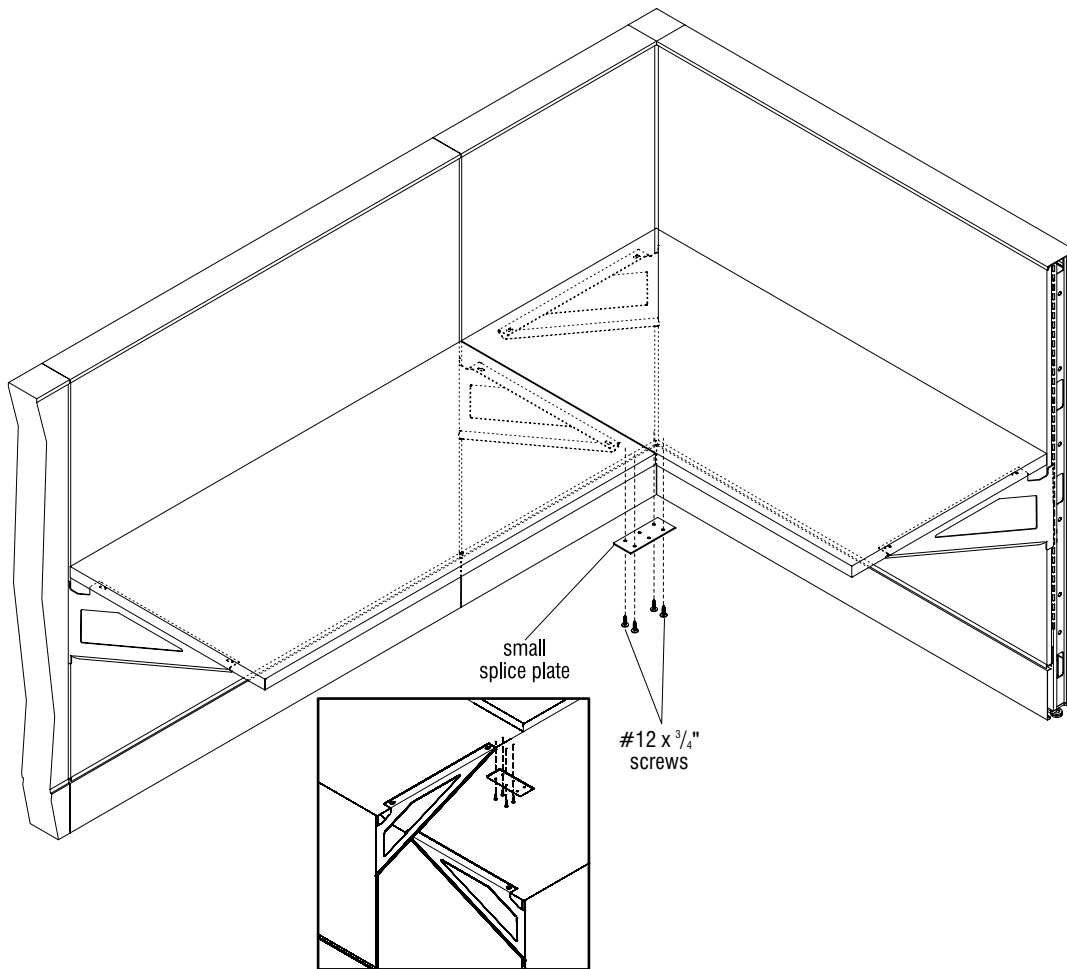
Standard Cantilever Bracket Installation with 24-30" Worksurfaces
